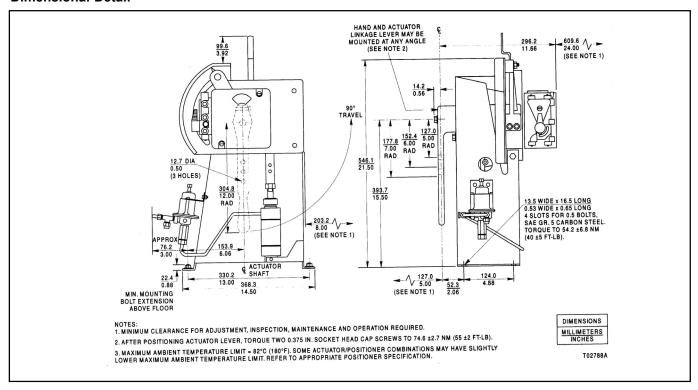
Type UP1 Actuator with Positioner and Air Failure Lock
